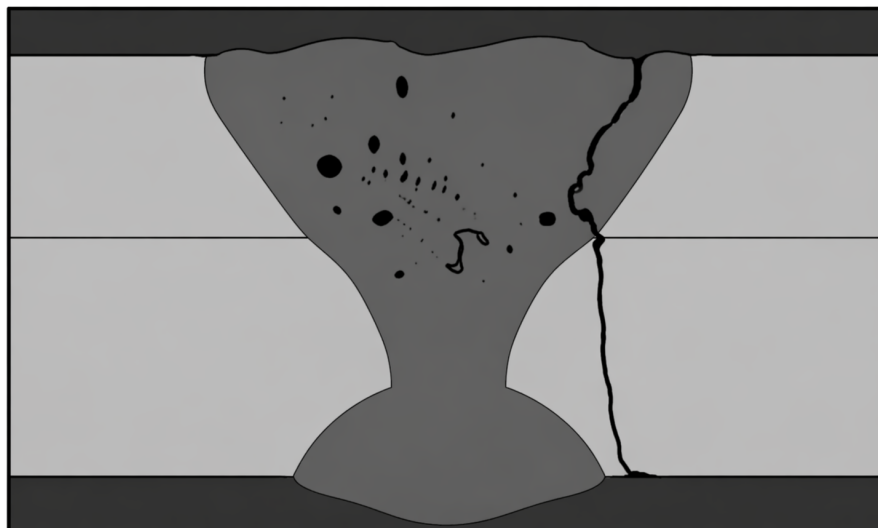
Illustration of porosity defects in a butt weld and how these defects may initiate fatigue cracks in both the weld and the base plate [10].
